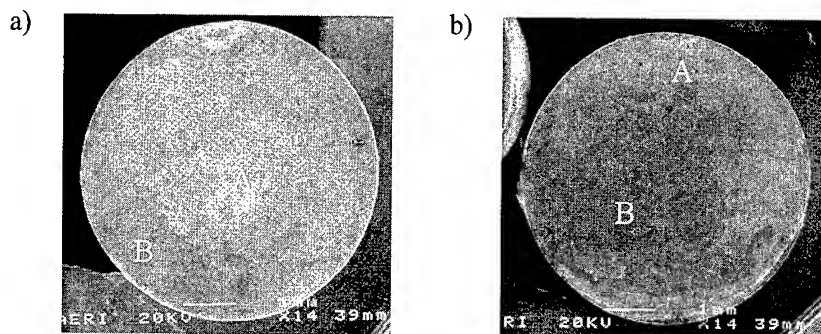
Fracture surface of samples brazed: (a) With BAg-19 at 944°C, 4 min; (b) with BVAg-30 at 868°C, 4 min.
